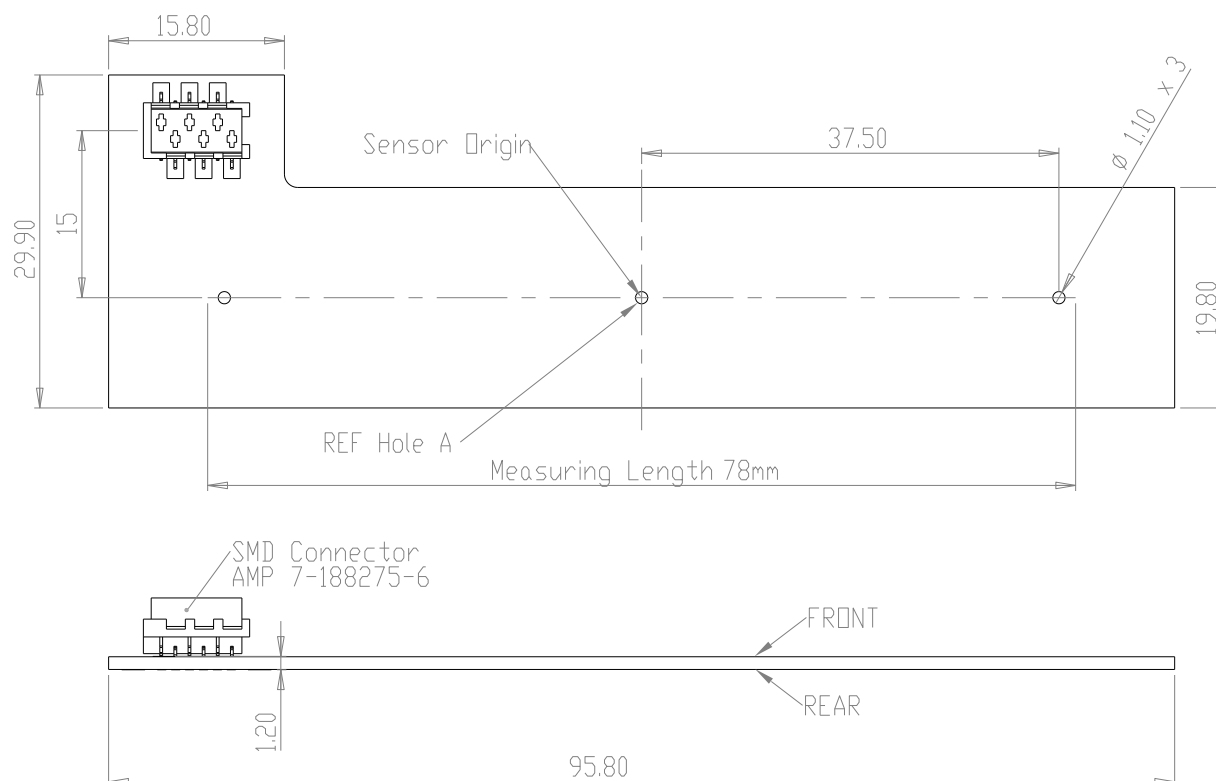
Mechanical drawing, sensor PCB assembly 013-0057
